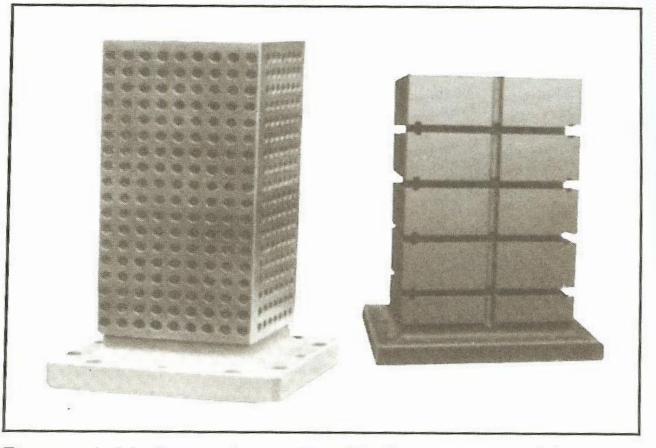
Four-sided tooling blocks. (Courtesy Mid-State Machine Products)
